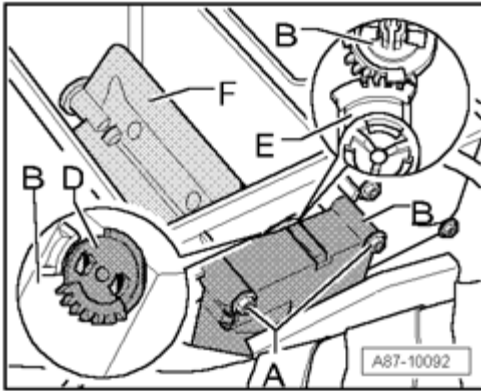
Identifying Bolts, Control Motor, And Connecting Element
